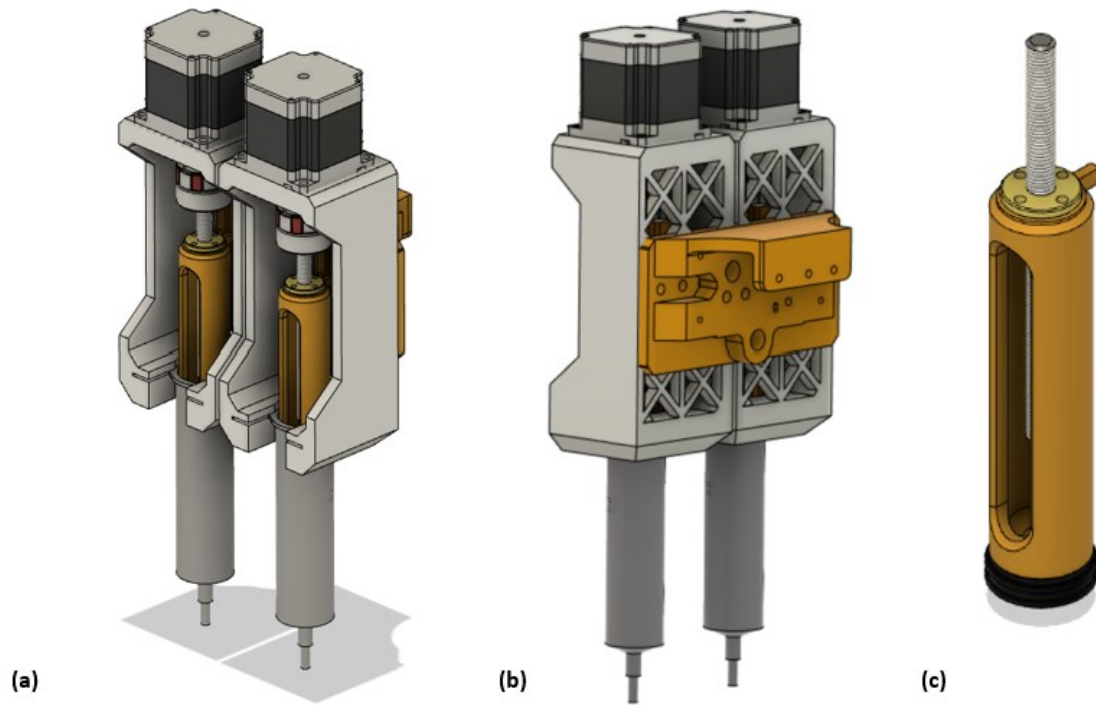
4th Design Iteration - Aquila Printer Multi-Material Extruder: (a) Front Side - Full Assembly of the Extruder on Fusion360, (b) Mounting Piece, (c) Direct Plunging Method
